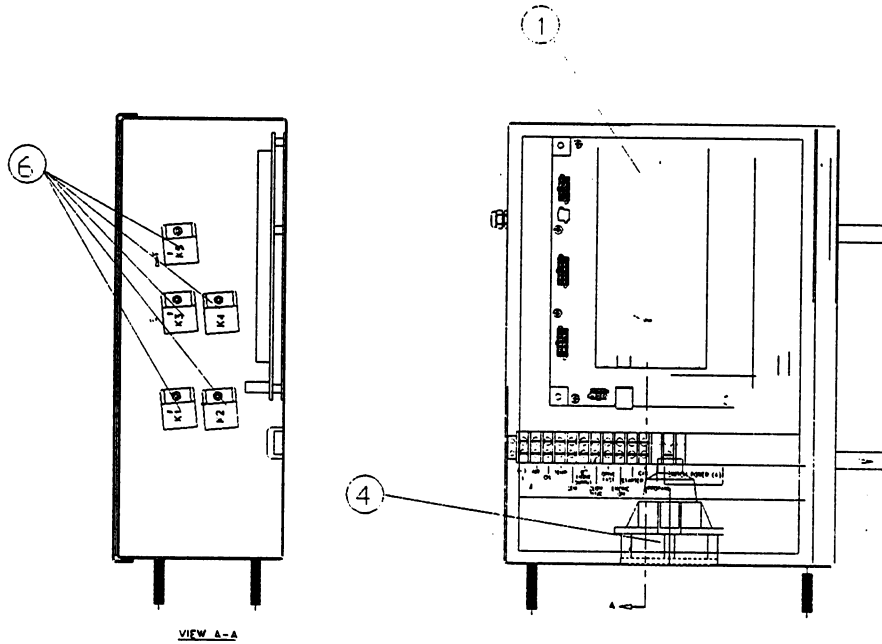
LOWER CONTROL BOX - INTERNAL VIEW
